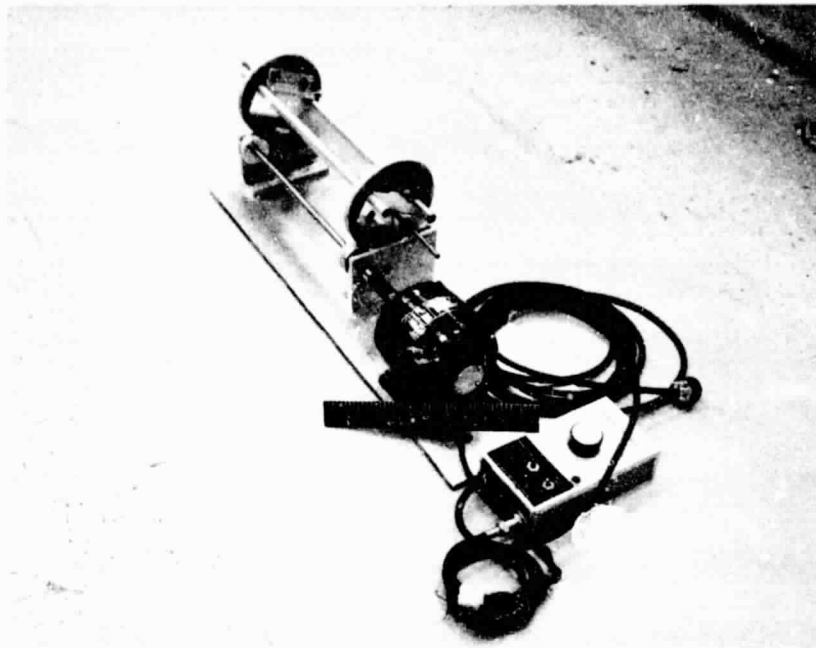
Rotational Casting Machine for Development of Cast Bladders
